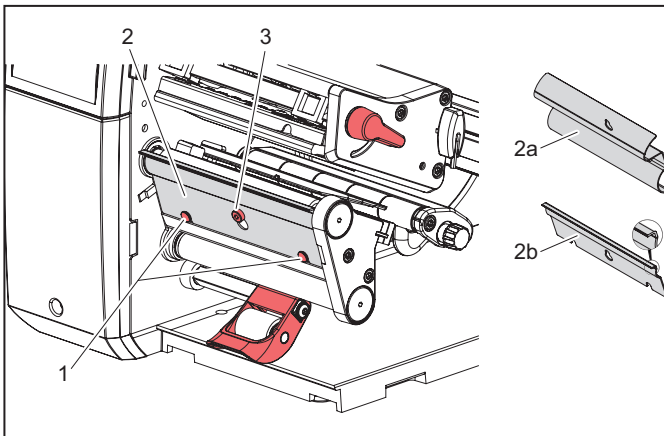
Removing and installing the deflection plate or dispensing edge
